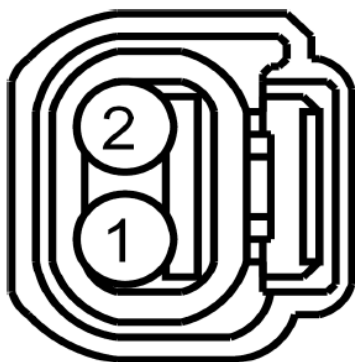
Coil On Plug 3 Connector End View (C1540)
